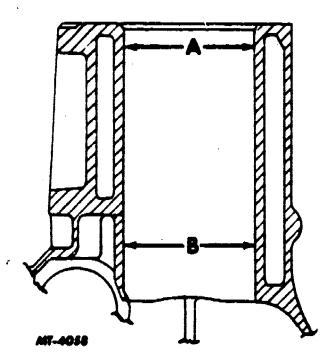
Measurements For Checking Cylinder Bore Taper
